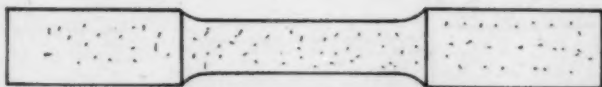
DEFECTS IN TEST BAR CASTING DUE TO EXCESSIVE PHOSPHORUS ADDITIONS. FINE GAS INCLUSIONS APPEAR IN FRACTURE, SOMETIMES REQUIRING 100 MAGNIFICATIONS FOR VISIBILITY.
